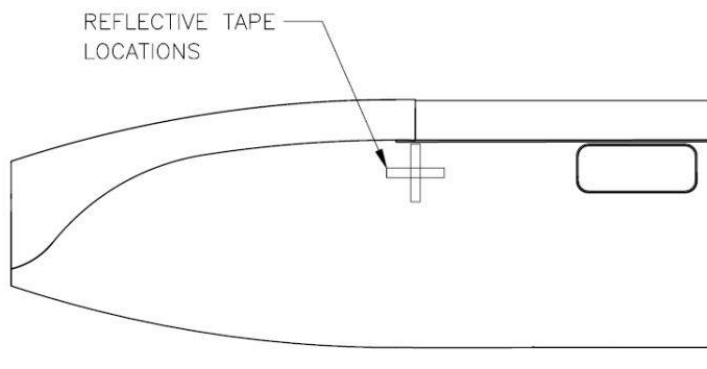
Reflective tape locations for Strobex, 1 piece each side, lower surface
